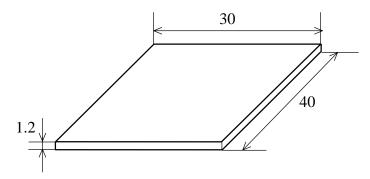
Dimension of die-quenched steel sheet for small punching clearance punching with automatic centring.
